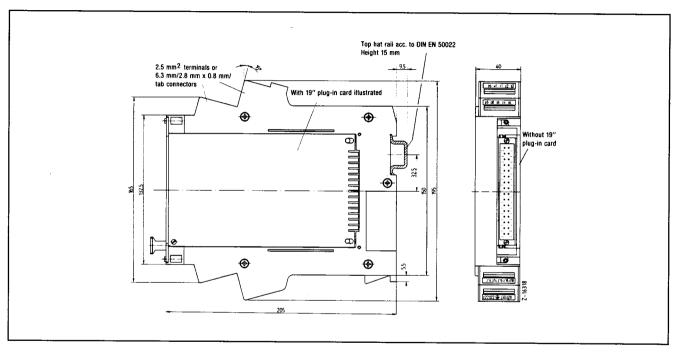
Dimensional drawing of surface-mounting case IP 20 (dimensions in mm)
